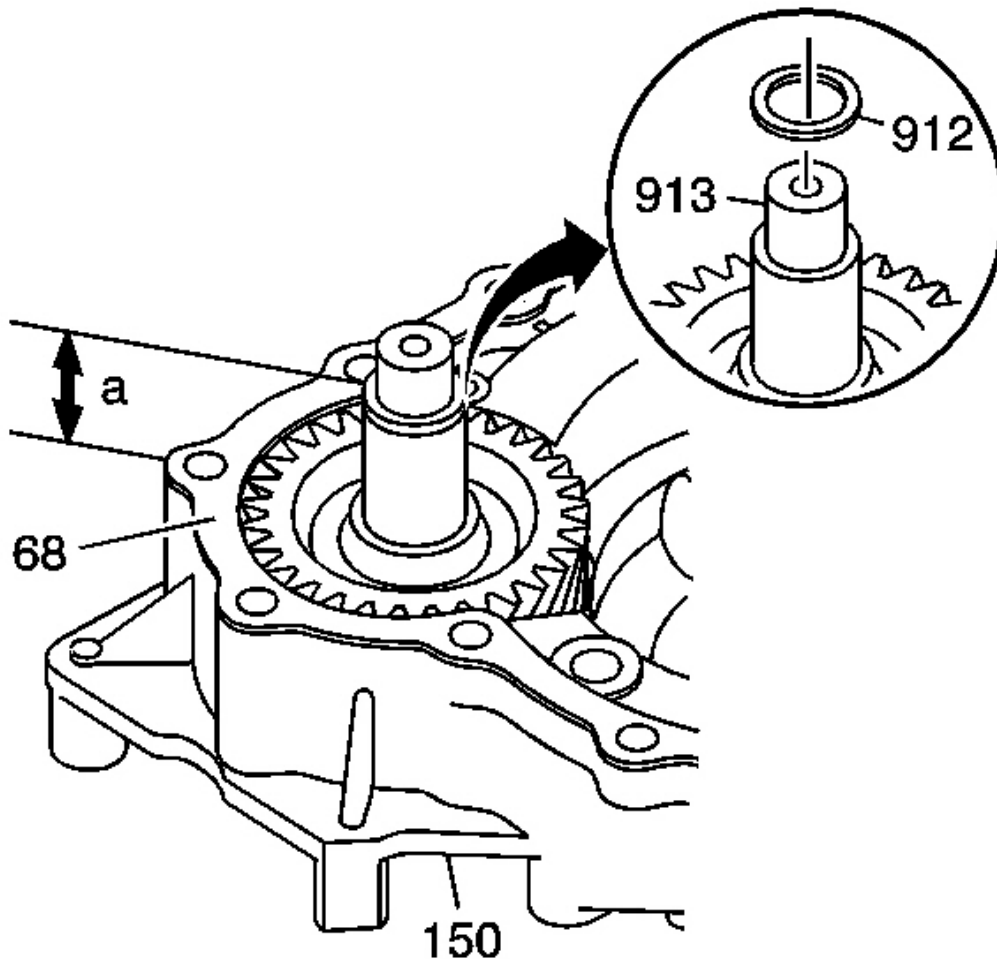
Transfer Case Input Gear Assembly & Selective Shim
